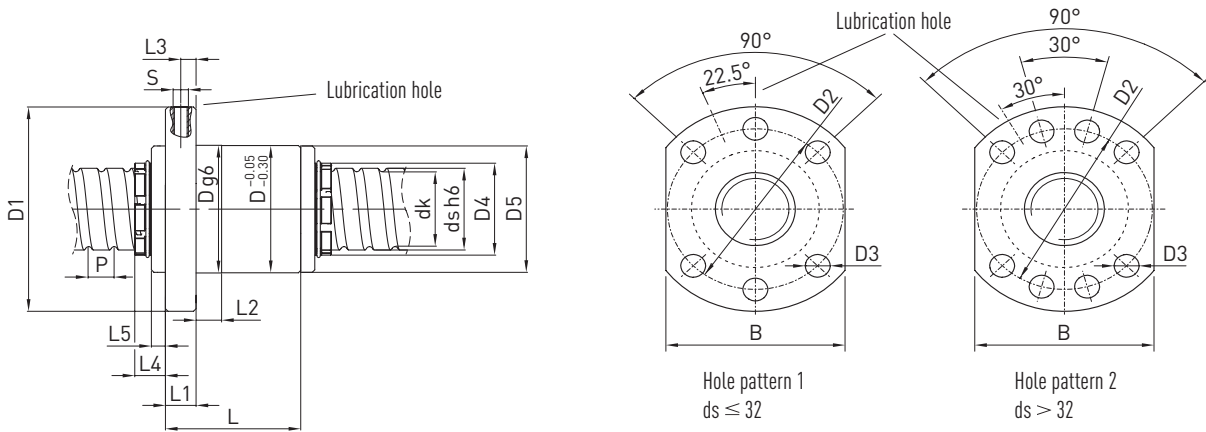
DEB single flanged nuts with SS and SH seals
